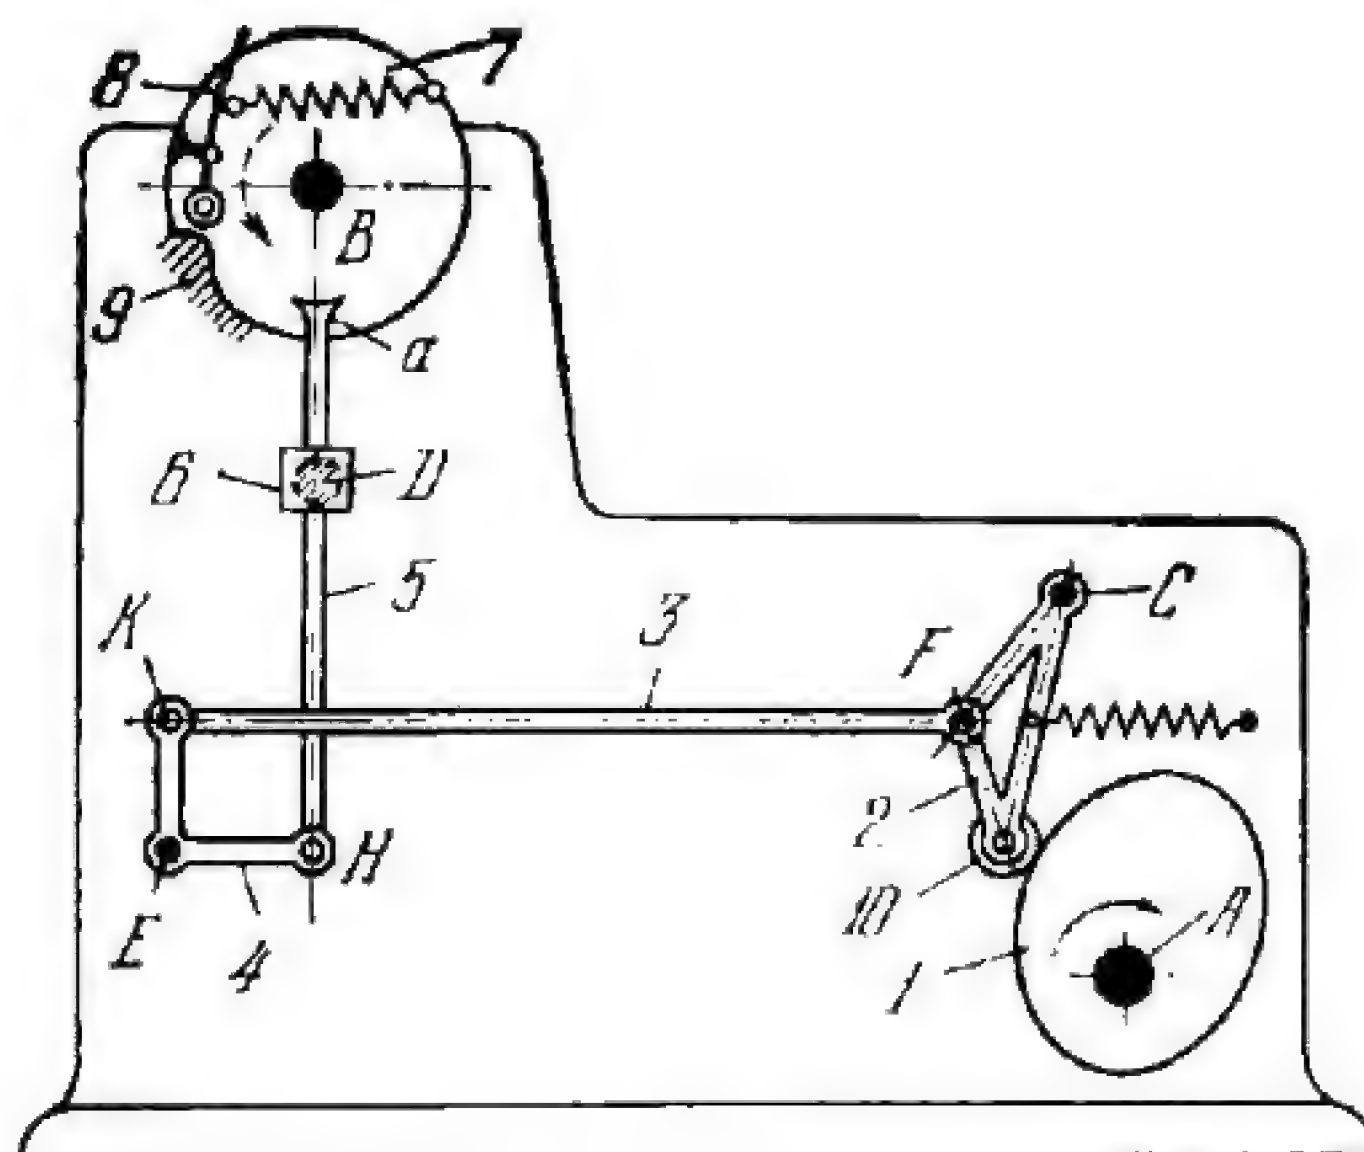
and impression cylinder 7 are rotated about fixed axes A and B by a drive powered from the main shaft of the printing press. Follower 2 oscillates about fixed axis C and carries roller 10 which rolls along the contour of cam 1. Link 3 is connected by turning pairs F and K to follower 2 and to link 4 which turns about fixed axis E. Link 5 is connected by turning pair H to link 4 and slides in link 6 which turns about fixed axis D. Link 5 has shaped end a. When, in the rotation of impression cylinder 7, grip 8 runs onto fixed cam 9, the grip opens to transfer the sheet of paper to the sheet extracting device. When the grip runs onto shaped end a, the grips open again so as to grip the next sheet.
